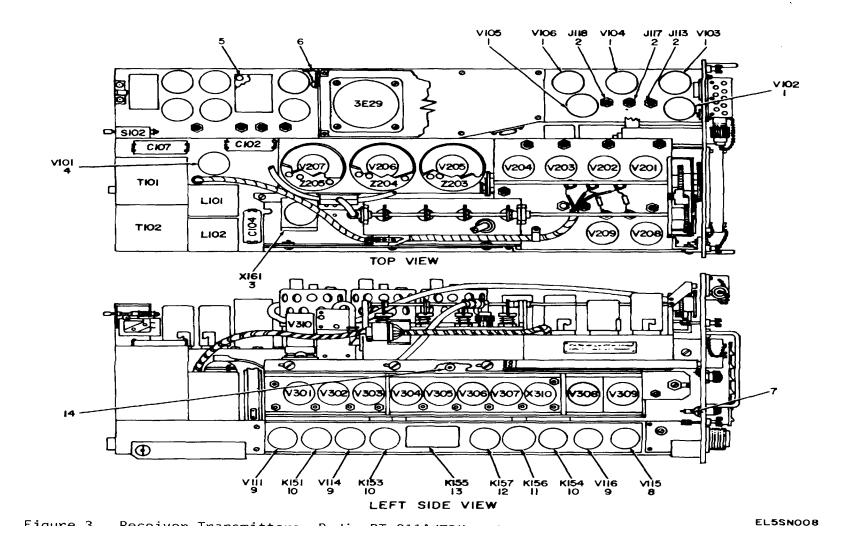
Receiver-Transmitter, Radio RT-211A/TPX and RT-264D/UPX-6 and Receiver-Transmitter, Radar RT-820/TPX-44, Main Chassis Assembly, Additional Components (Sheet 1 of 2).
